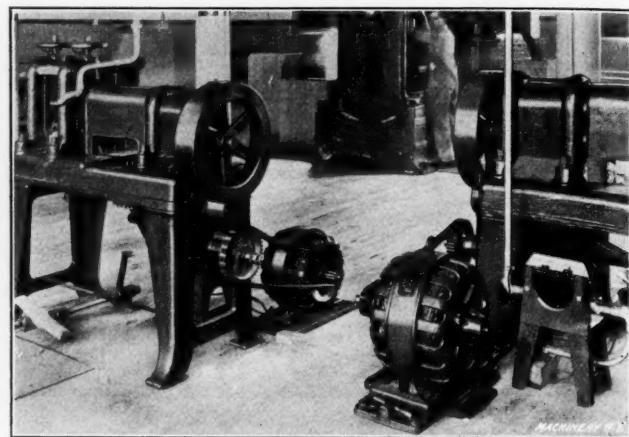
Method of Driving Rolling Mills with Morse Chains
